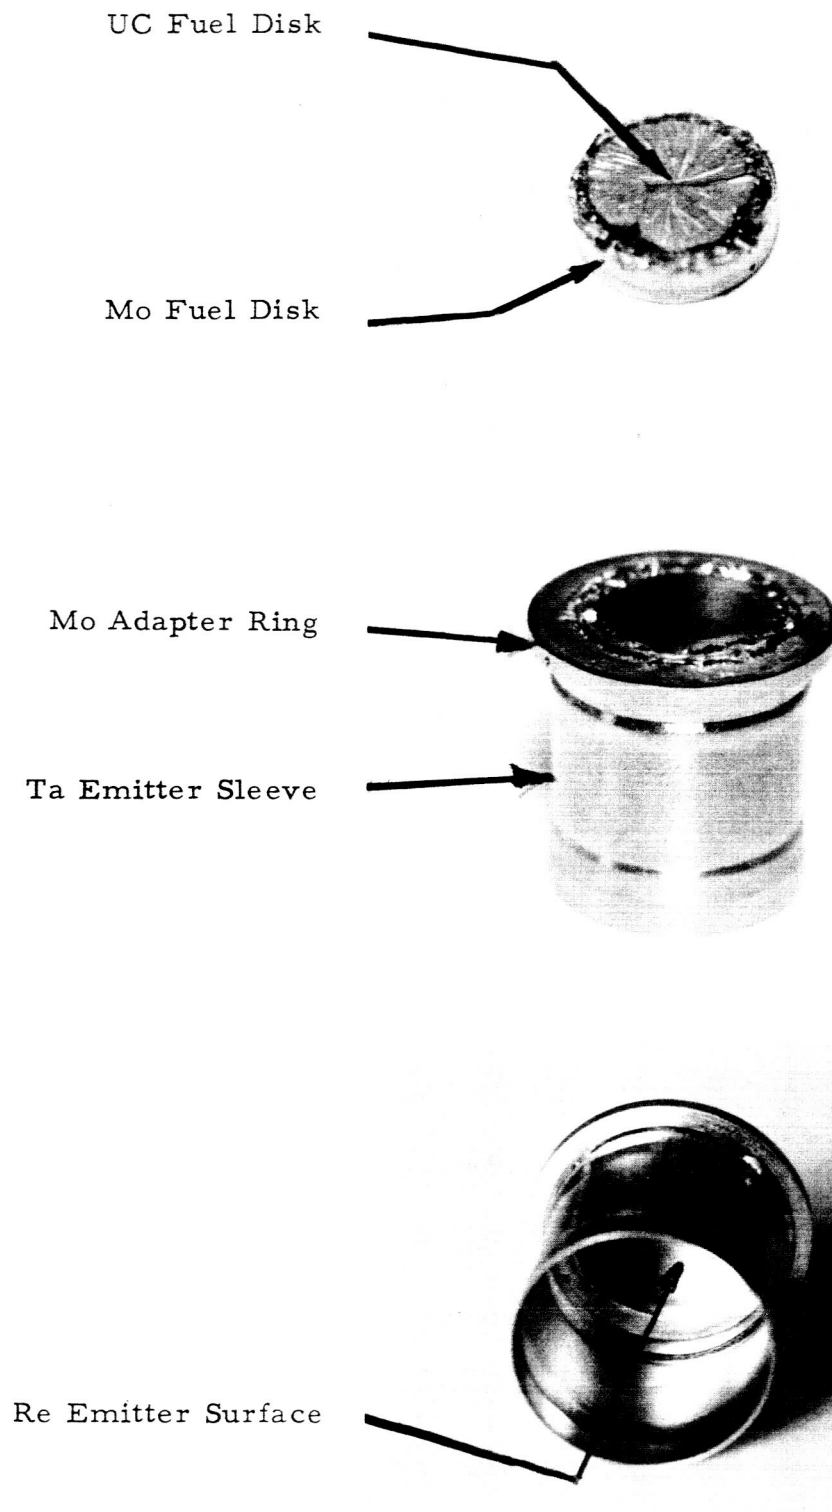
Components of DC-1 Fuel-Emitter After Disassembly
